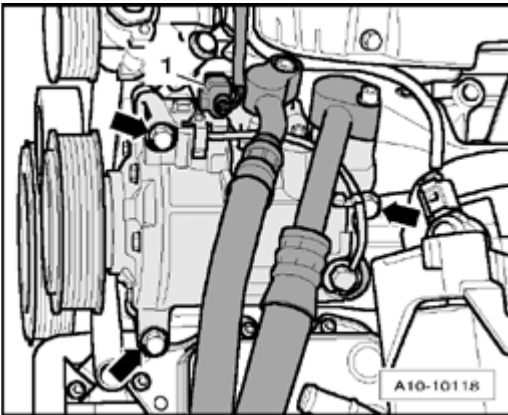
Disconnecting Connector For Wiring To Air Conditioning Compressor Clutch Solenoid
